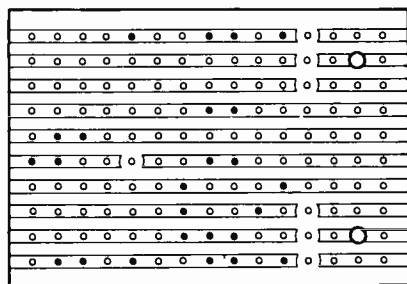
Illustrating the layout of the components on the Veroboard panel together with general wiring details
